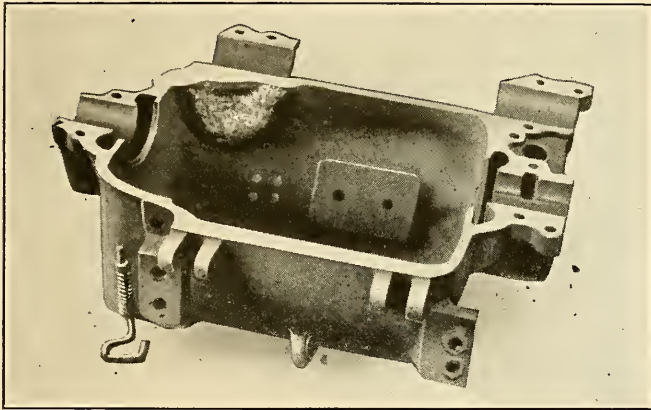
Motor Case Welded and Ready for Service.
